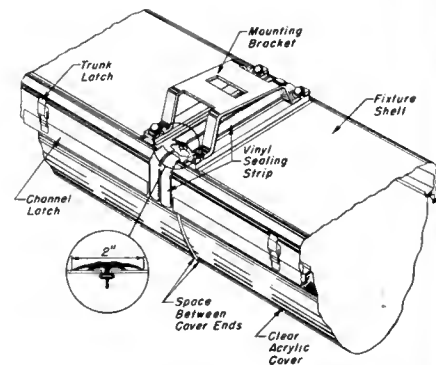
Joint between fixtures illustrating how mounting brackets support and align the two ends of adjacent fixture housings so that the extruded vinyl sealing strip can effectively seal the joint.
